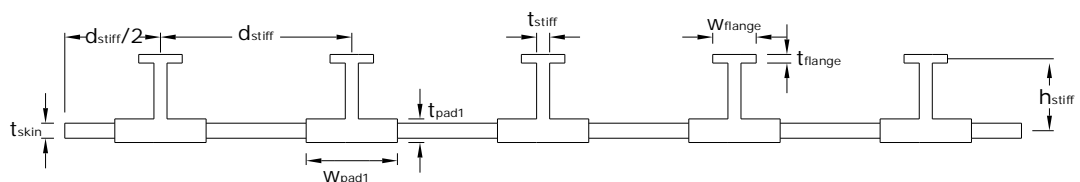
T shaped stiffened plate and pads under stiffeners
